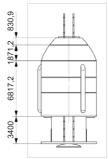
Side view of the climber with dimensions (mm) [own source].
